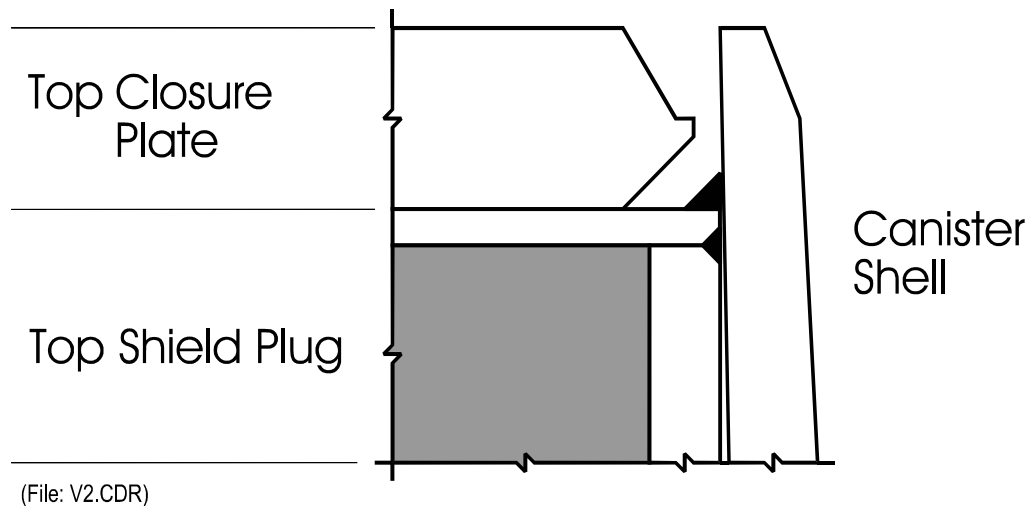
Original Shield Plug-to-Canister Shell Weld Configuration
